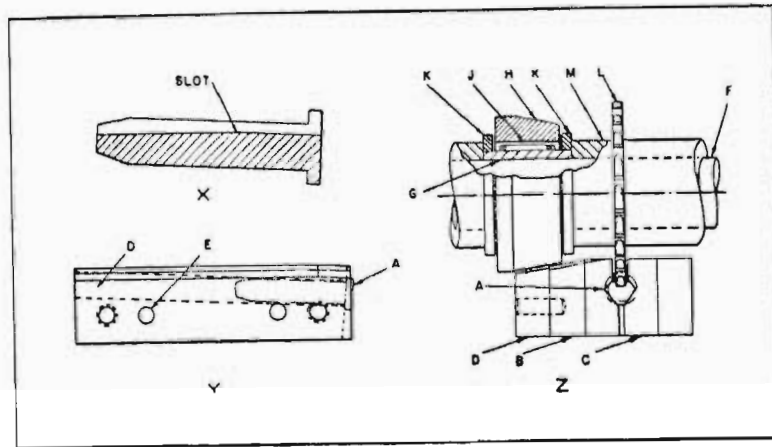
Follower Mechanism Used in Milling a Contoured Slot in a Cylindrical Part as Shown at X.
